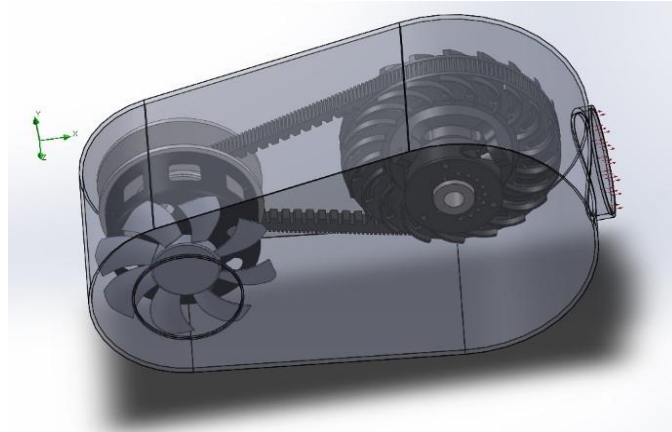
Final Assembly of the CVT with impeller and CVT Casing
